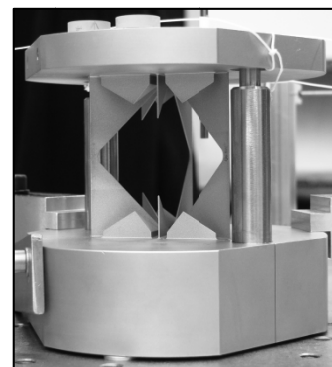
Wire-EDM machined aluminium prototype of the single-stage pivot
